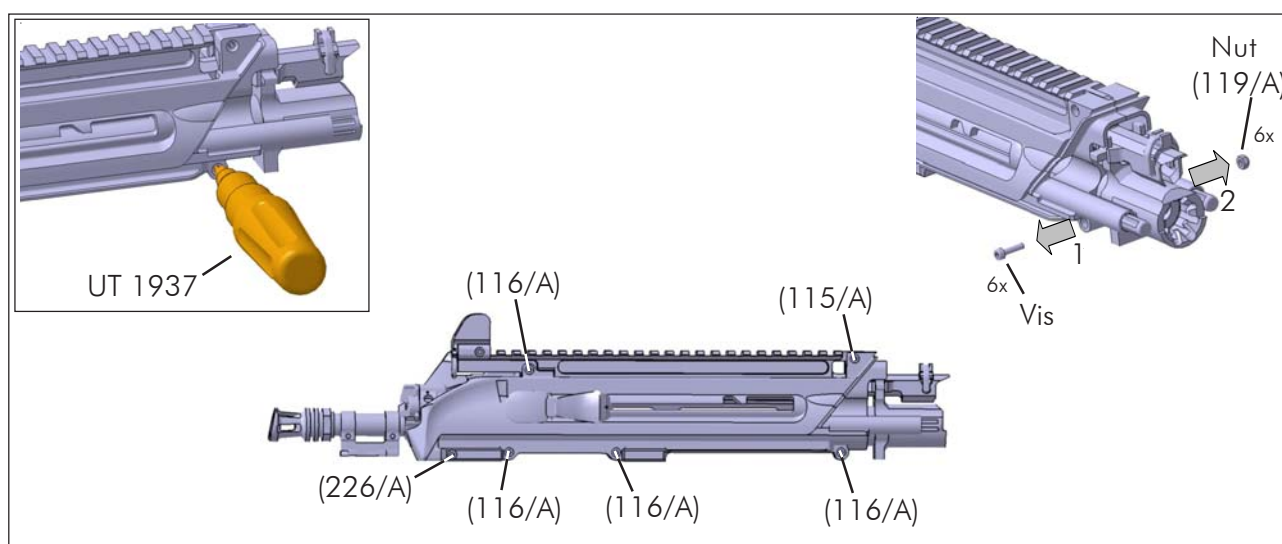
q - Removal of the 6 securing screws (115/A), (116/A) and (226/A)
